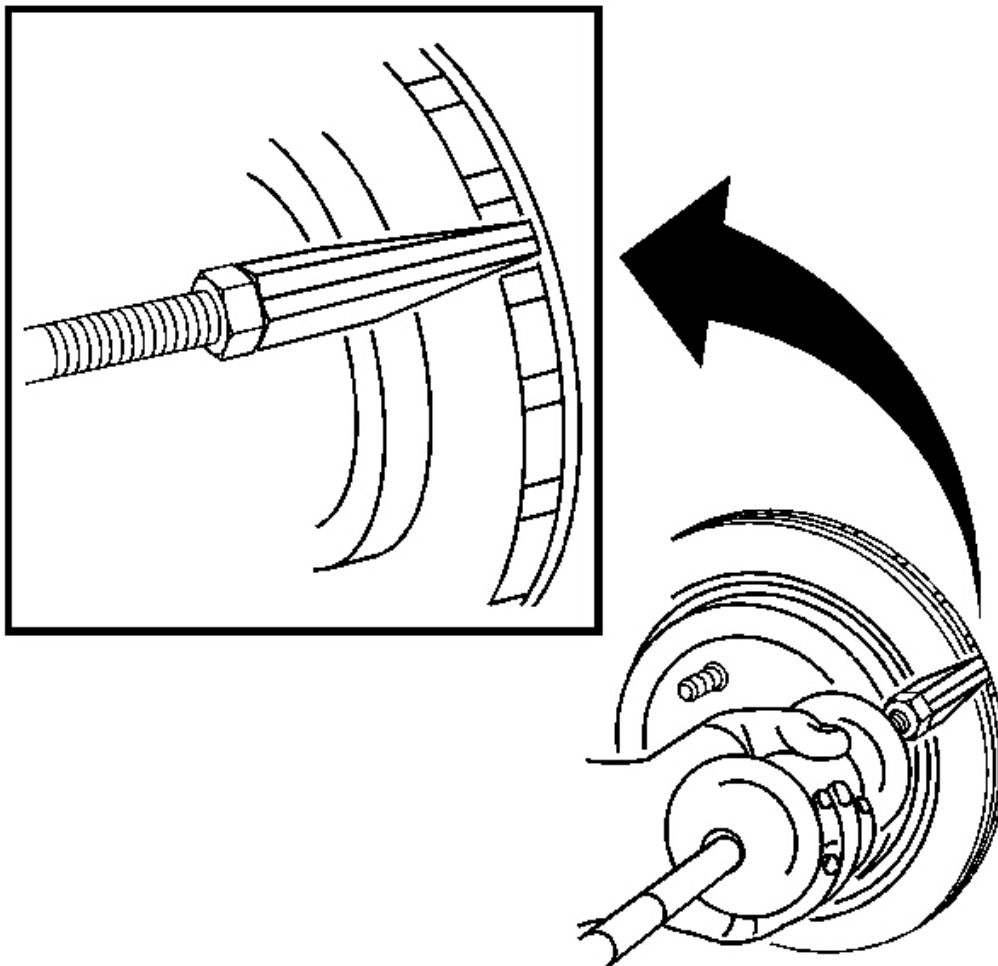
View Of Rotor From Hub Assembly Removal Using J-46277 & J 2619-01
